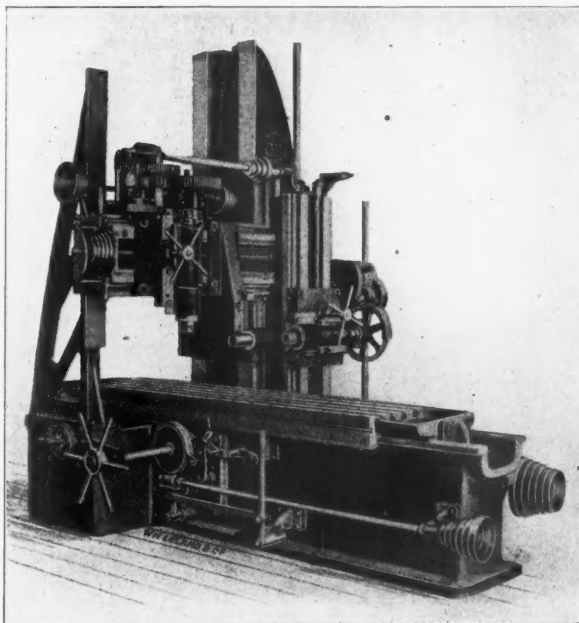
The Beaman & Smith Combined Vertical and Horizontal Spindle Milling Machine.
